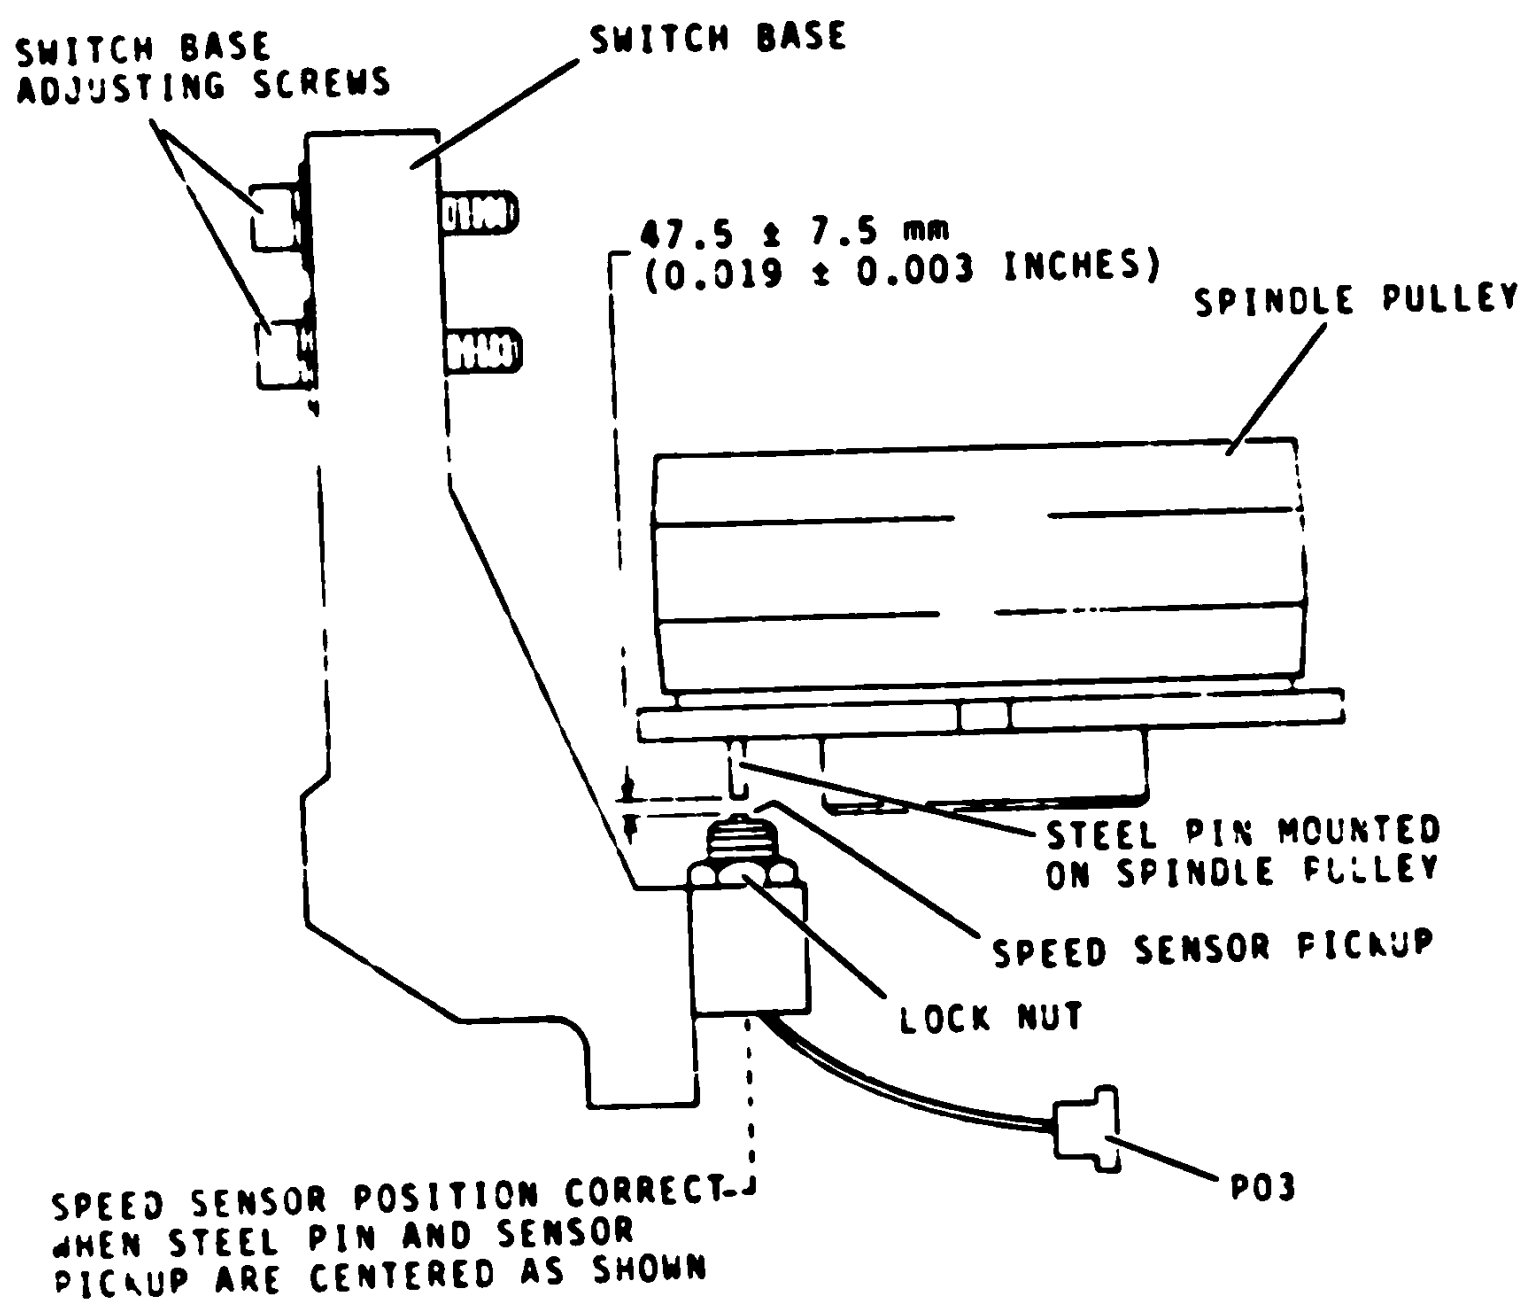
SENSOR ASSEMBLY ADJUSTMENT
